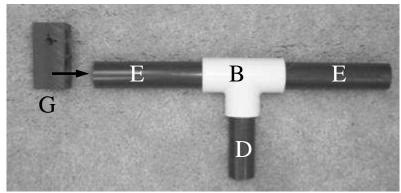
Assembly of the Small Wheelchair (Step 5).
